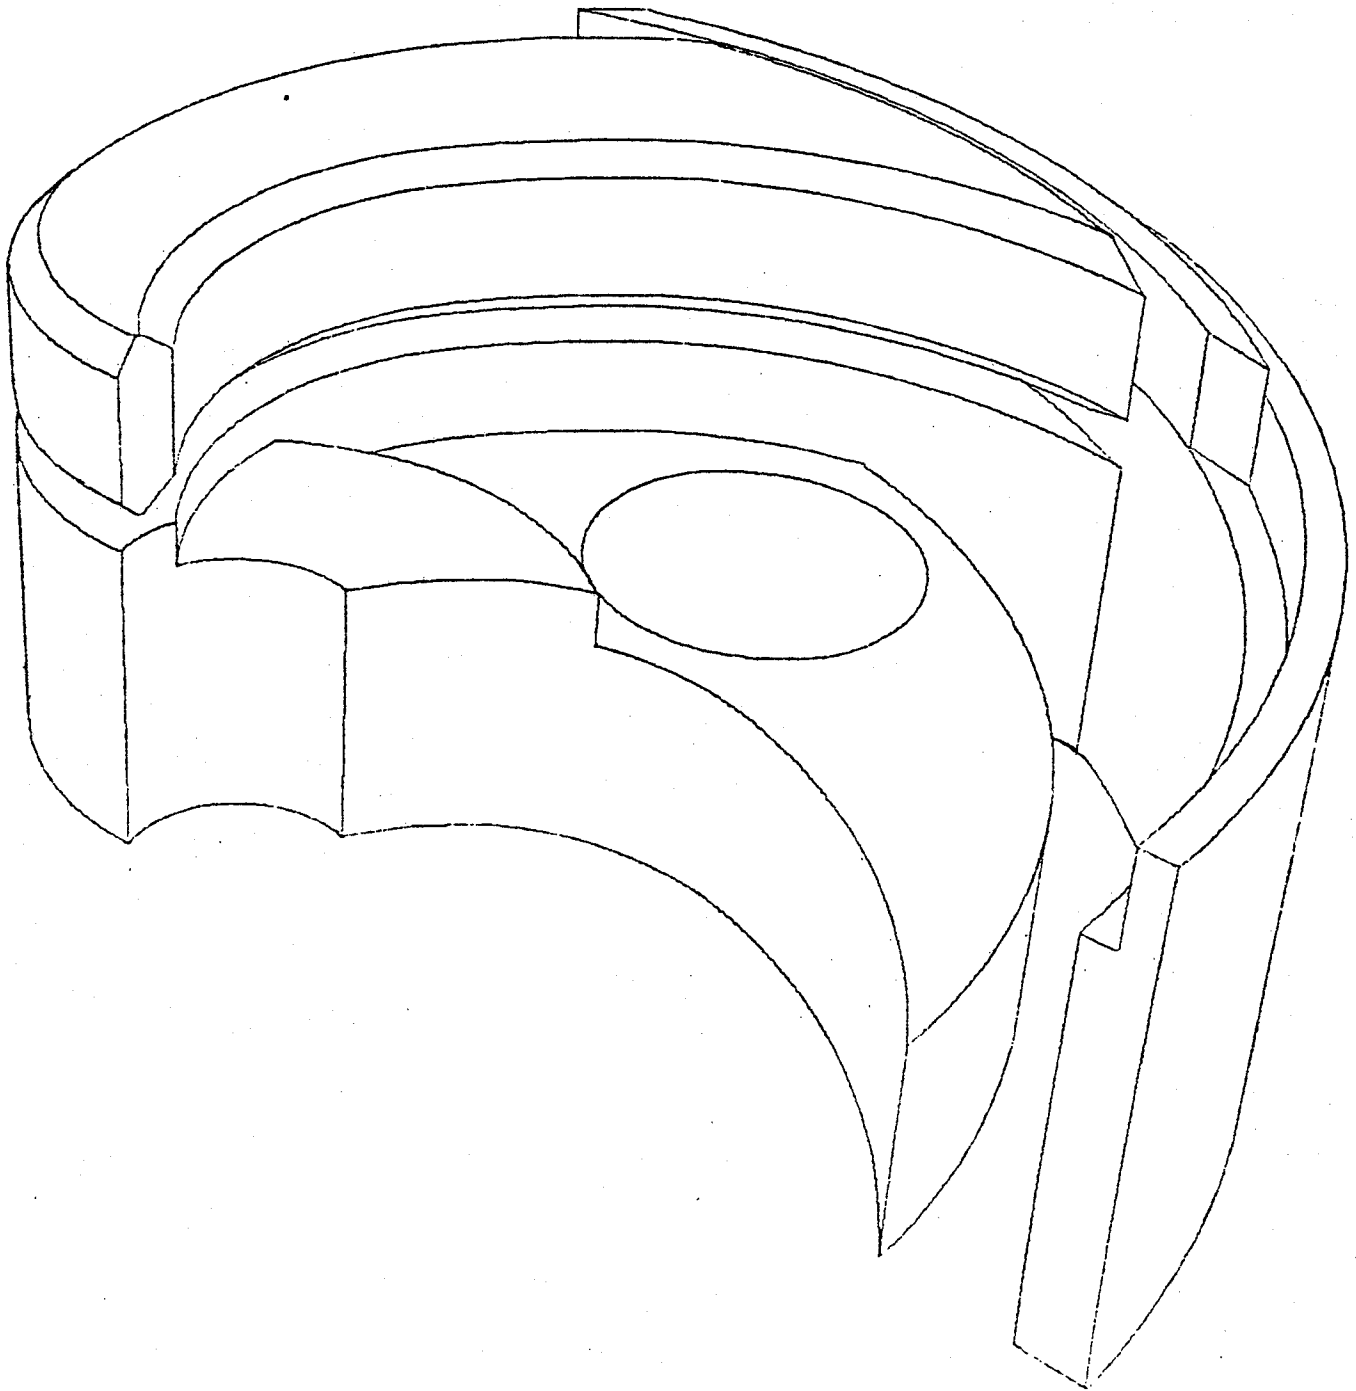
Perspective view of a sector for the K-500 pole tip geometry.
